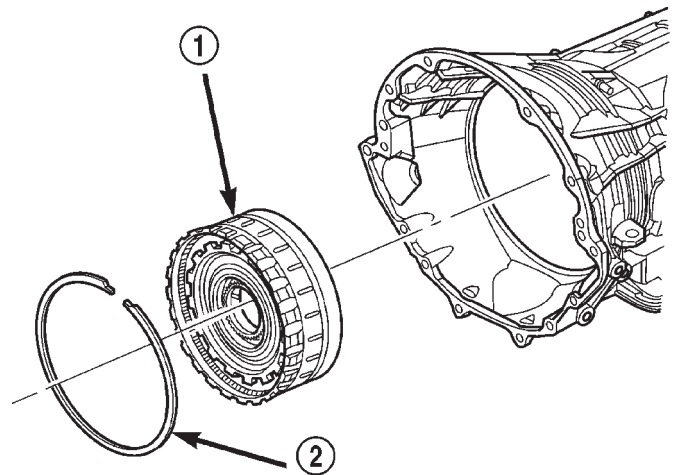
Remove Input/Reverse Planetary Assembly
